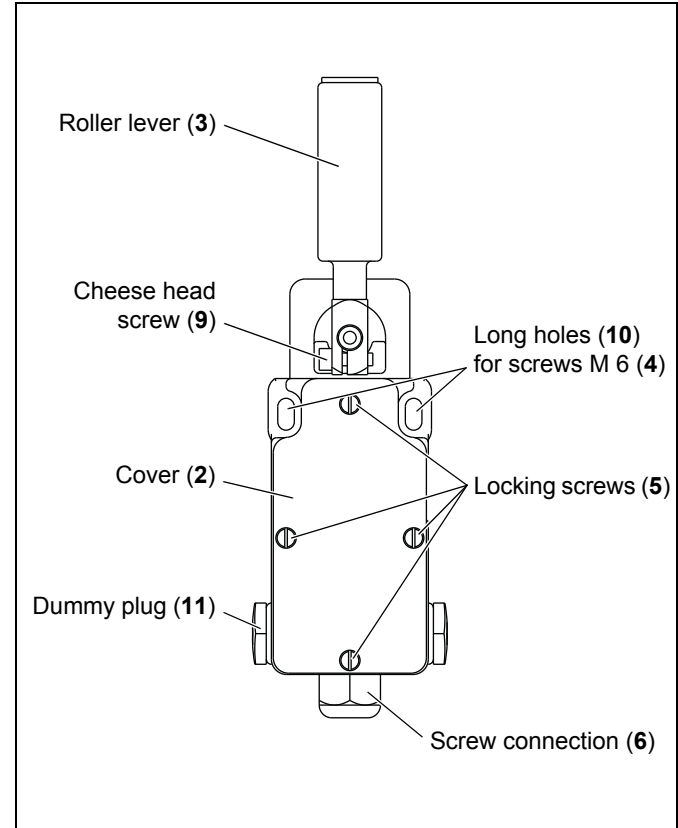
Mounting the belt misalignment switch onto the conveyor
